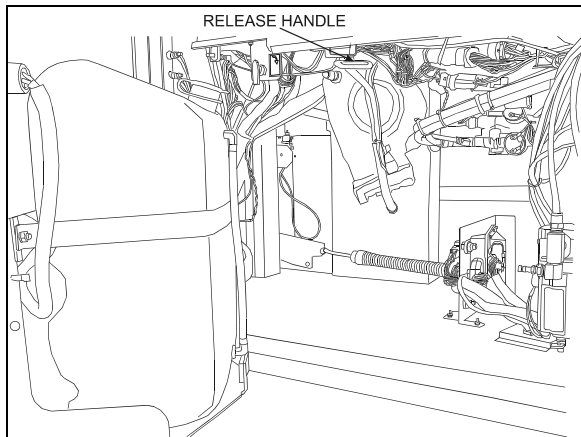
FRONT BUMPER RELEASE HANDLE
